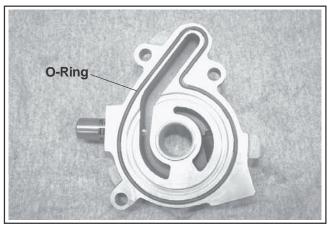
O-Ring Installed in Oil Pump Housing.
